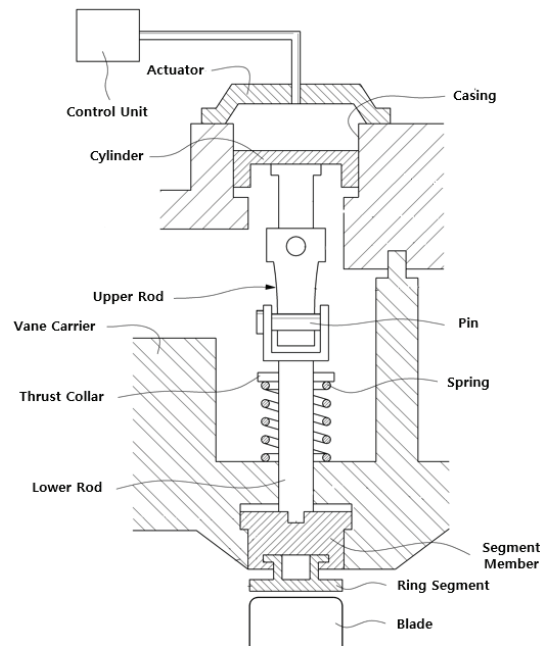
Sectional view of pneumatic type turbine clearance control system
